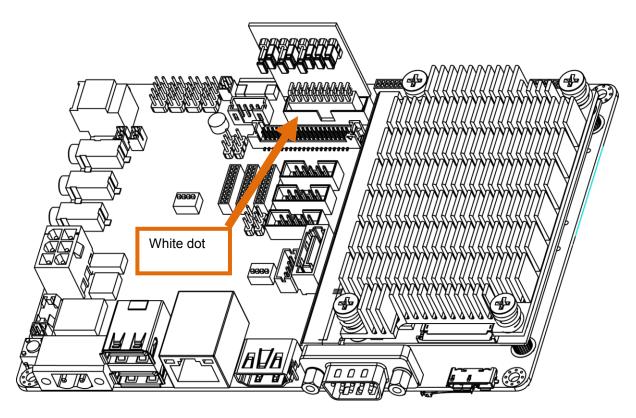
the EDM-MNF-BOOT PCB inserted in the MNF connector
